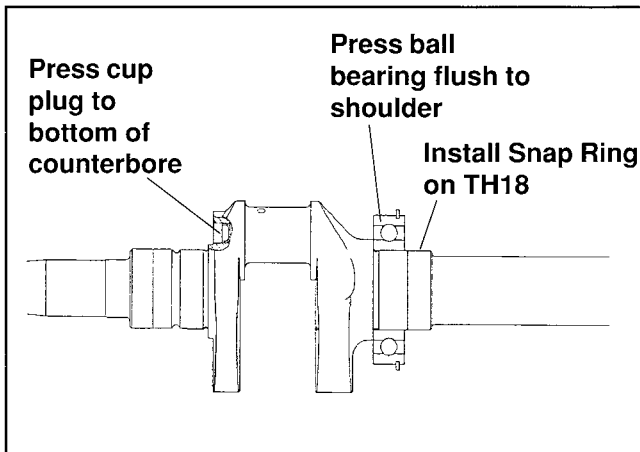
Cup plug, Ball Bearing Installation Detail.
